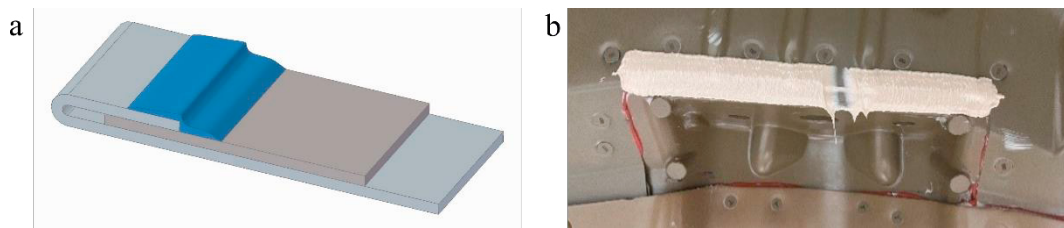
Schematic presentation of a sealing seam coating two sheets (a); Slitted sealing seam in the wheelhouse of a car (b).
